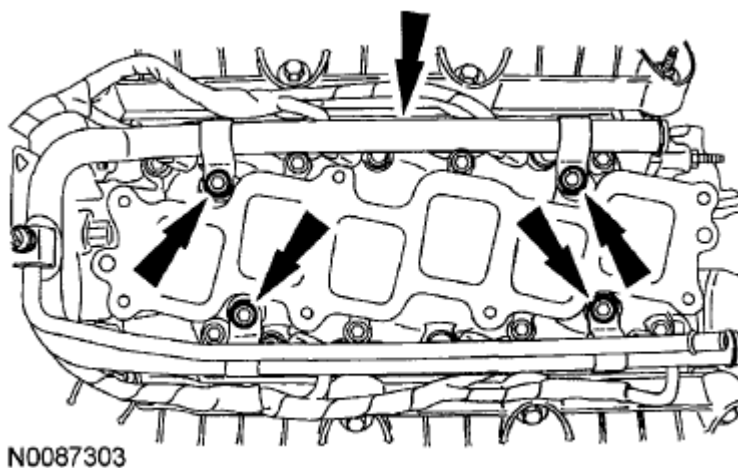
Locating Bolts, Fuel Rail And Injectors
